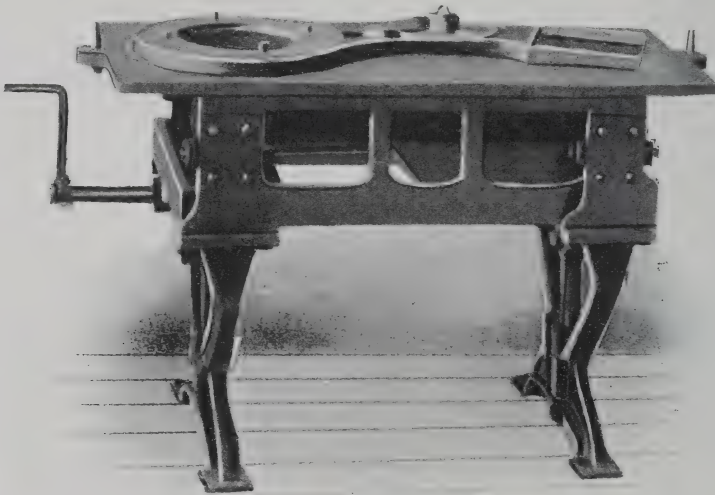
"PRIDMORE" DOUBLE STAND SINGLE SHAFT MACHINE, 16 IN. BY 24 IN., WITH RAILWAY SIGNAL ARM PATTERN.
